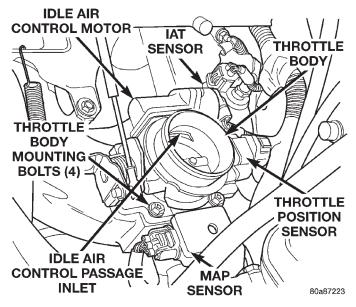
Throttle Body and Sensor Locations—2.5L Engine
